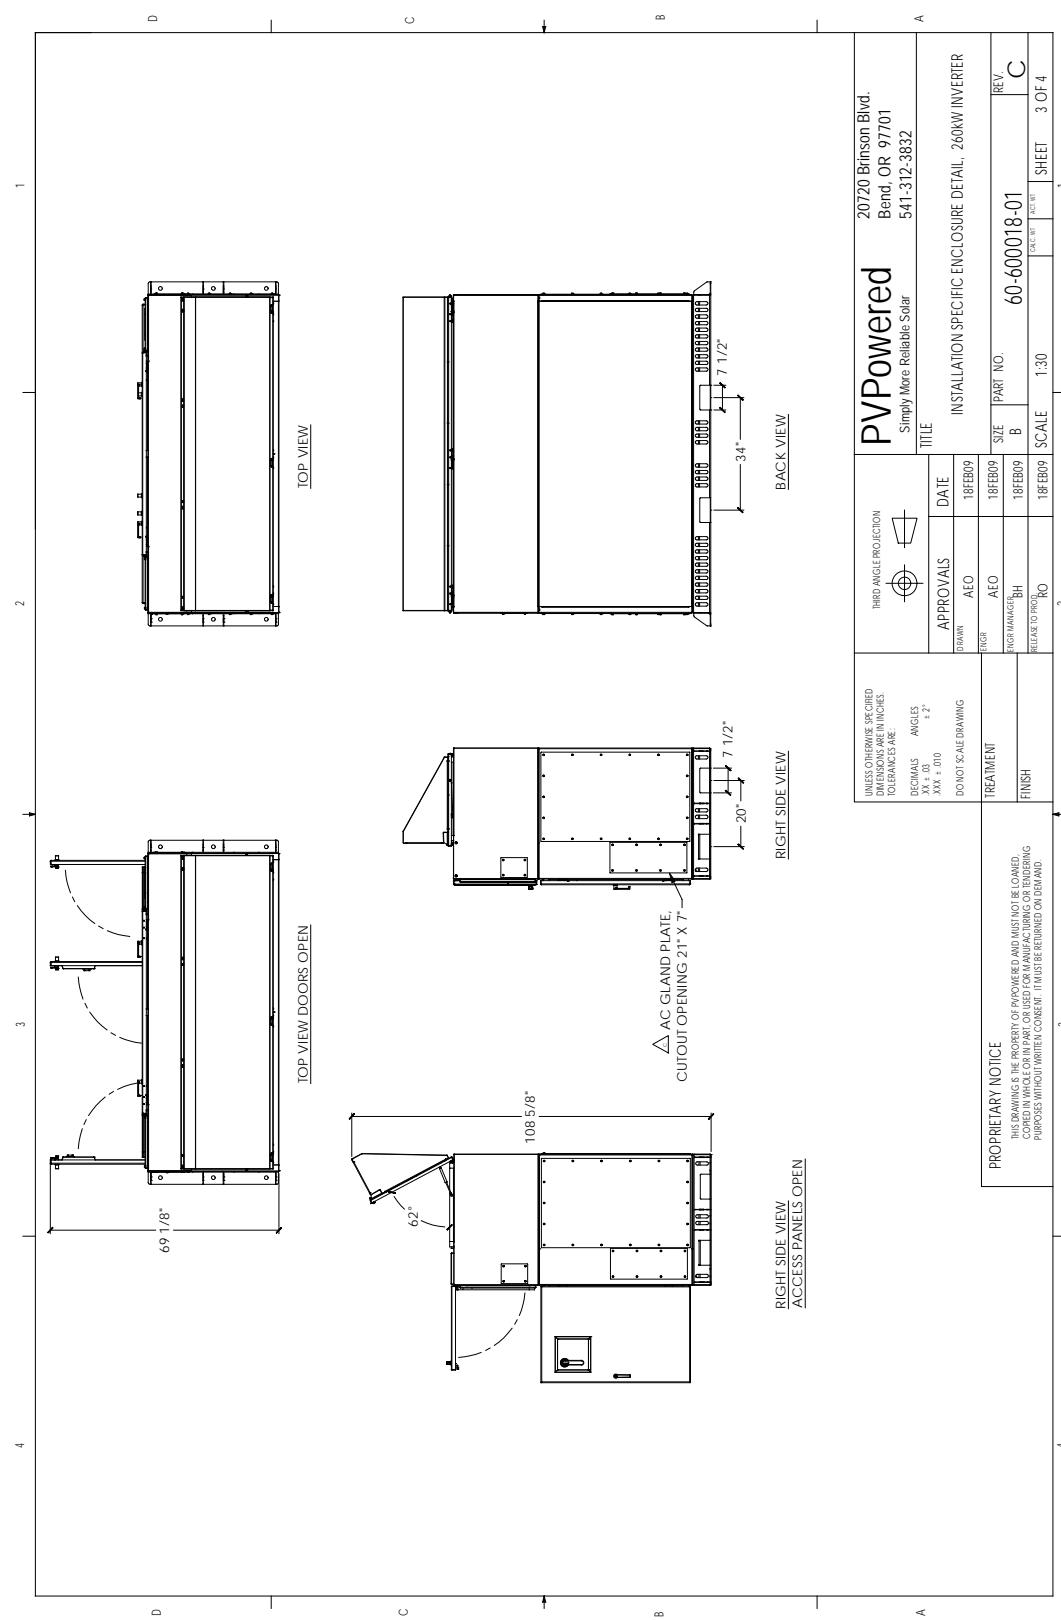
PVP250kW/PVP260kW Mechanical Drawing - View 3
